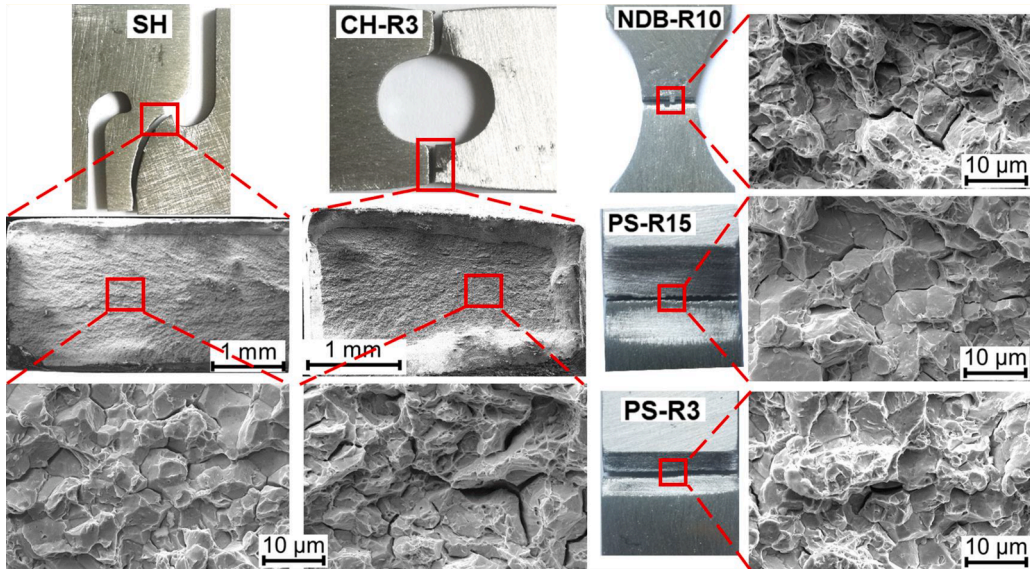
Fracture mechanisms of the investigated Q&P steel in different tensile specimens.
